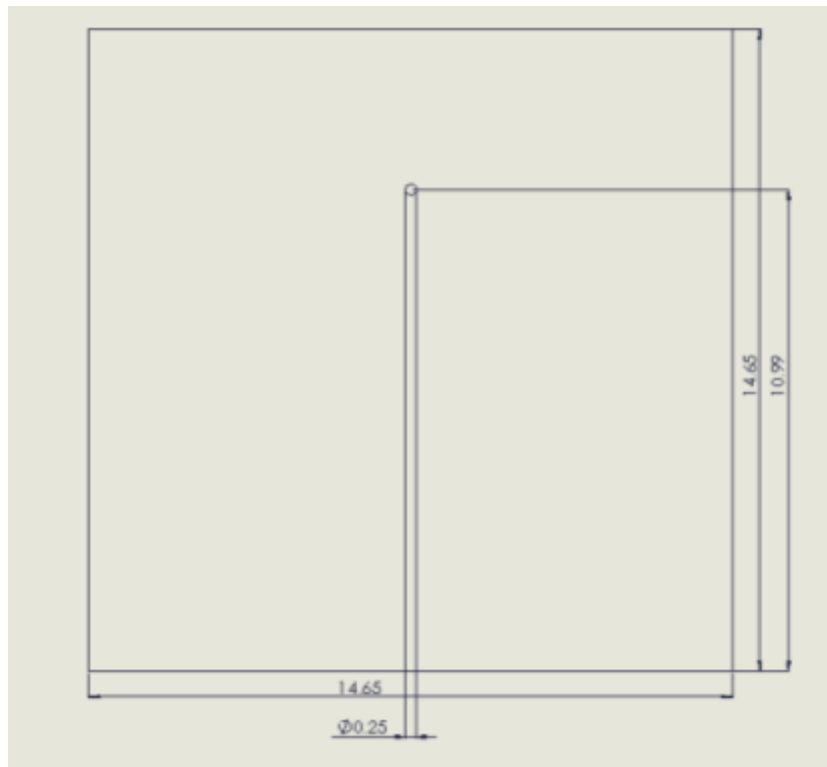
Reservoir 5_2 Dimensional Drawing
